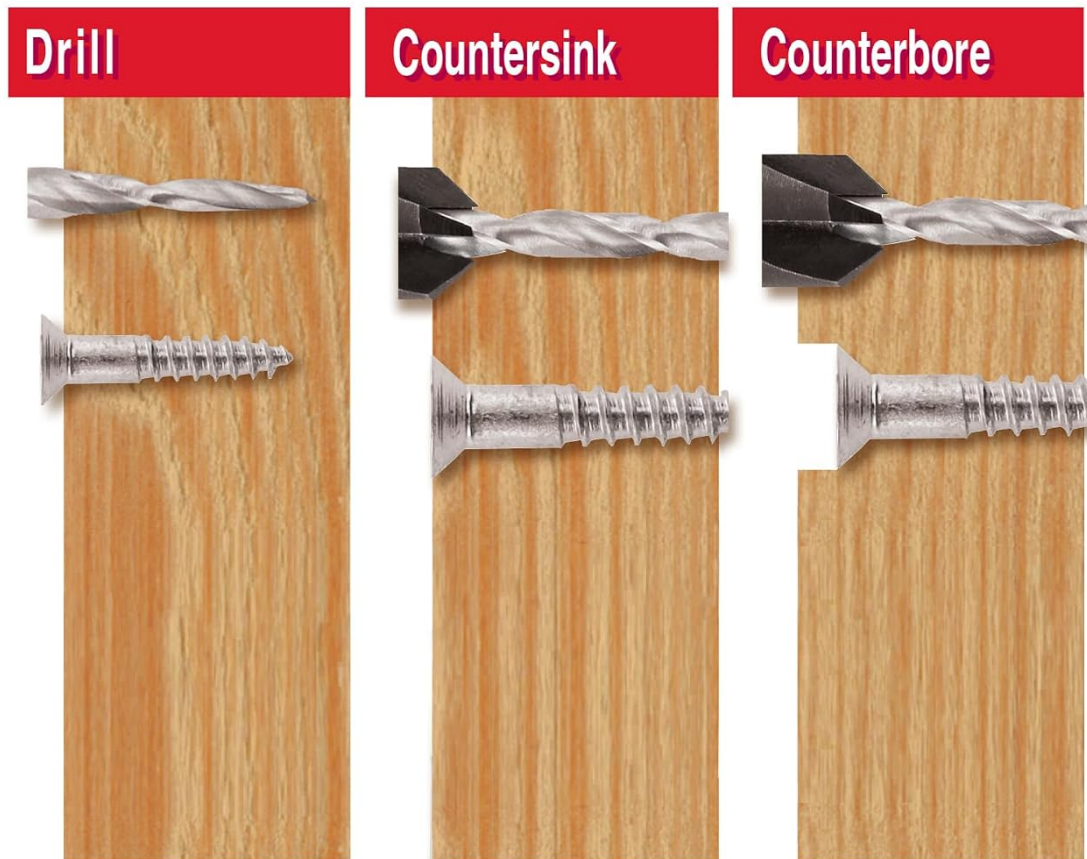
Visual representation of the three stages of operation: drilling a pilot hole, countersinking for a flush screw head, and counterboring for a recessed screw head or plug.
